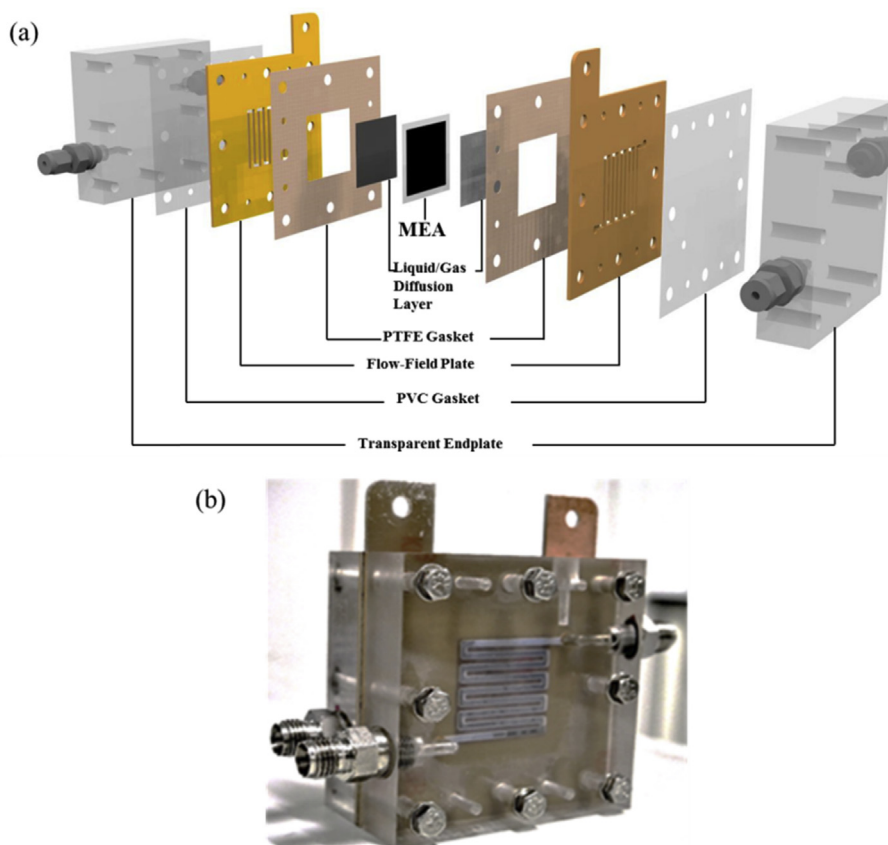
In-house fabricated transparent PEMWE: (a) schematic of cell components; (b) photograph of the assembled cell.
